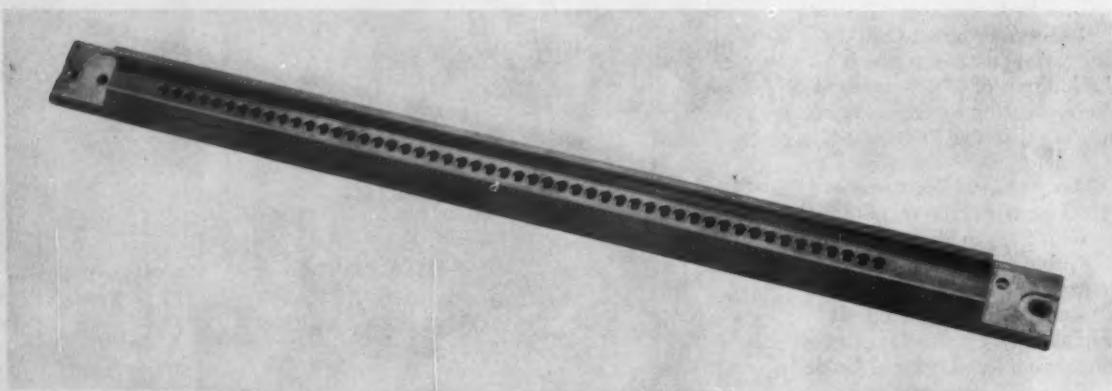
Fifty holes, each requiring five operations, are machined in this steel computer rail. The use of tape-controlled equipment and relatively simple tooling eliminated the need for an expensive indexing fixture.
